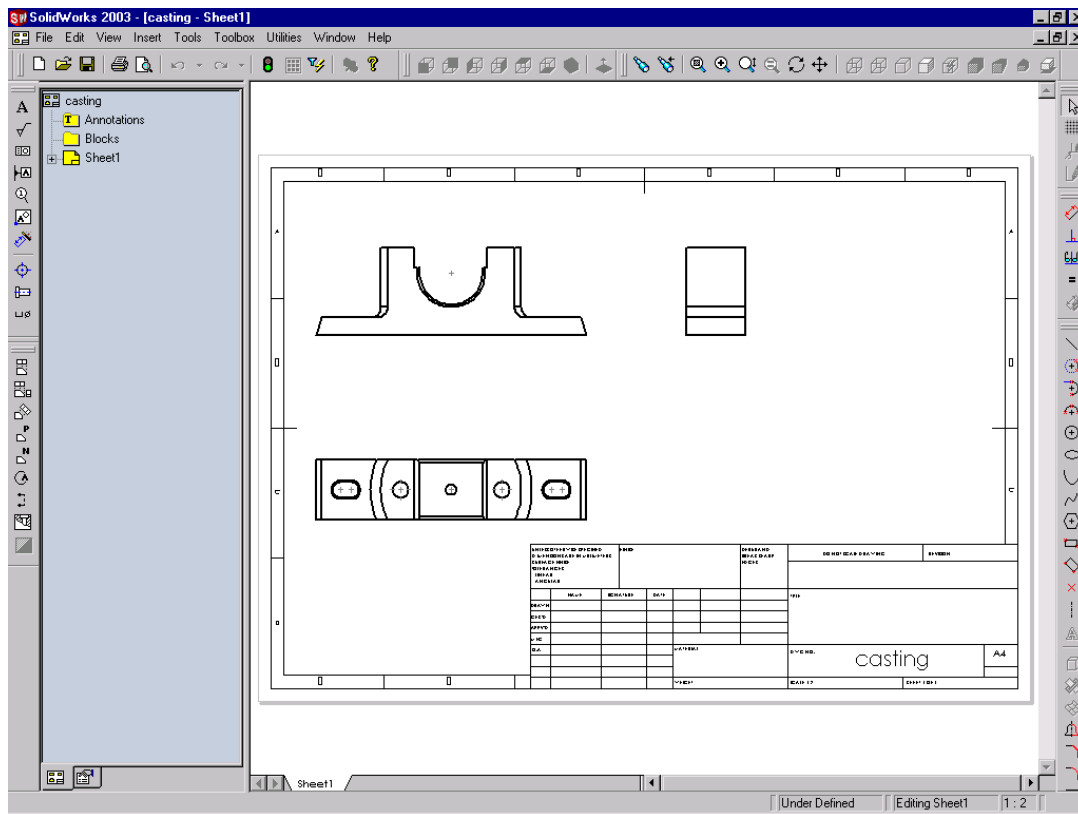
Three standard views created using the Standard 3 View tool
